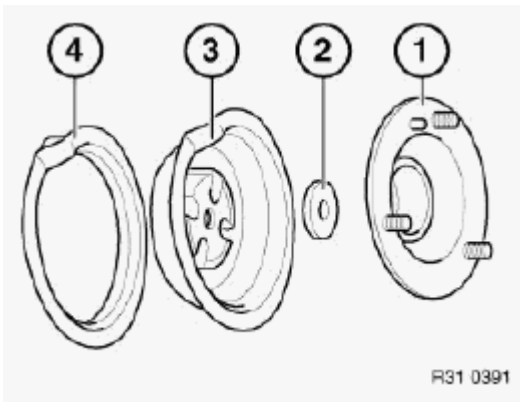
Spring Plate, Support Bearing And Dust Sleeve And Shim
